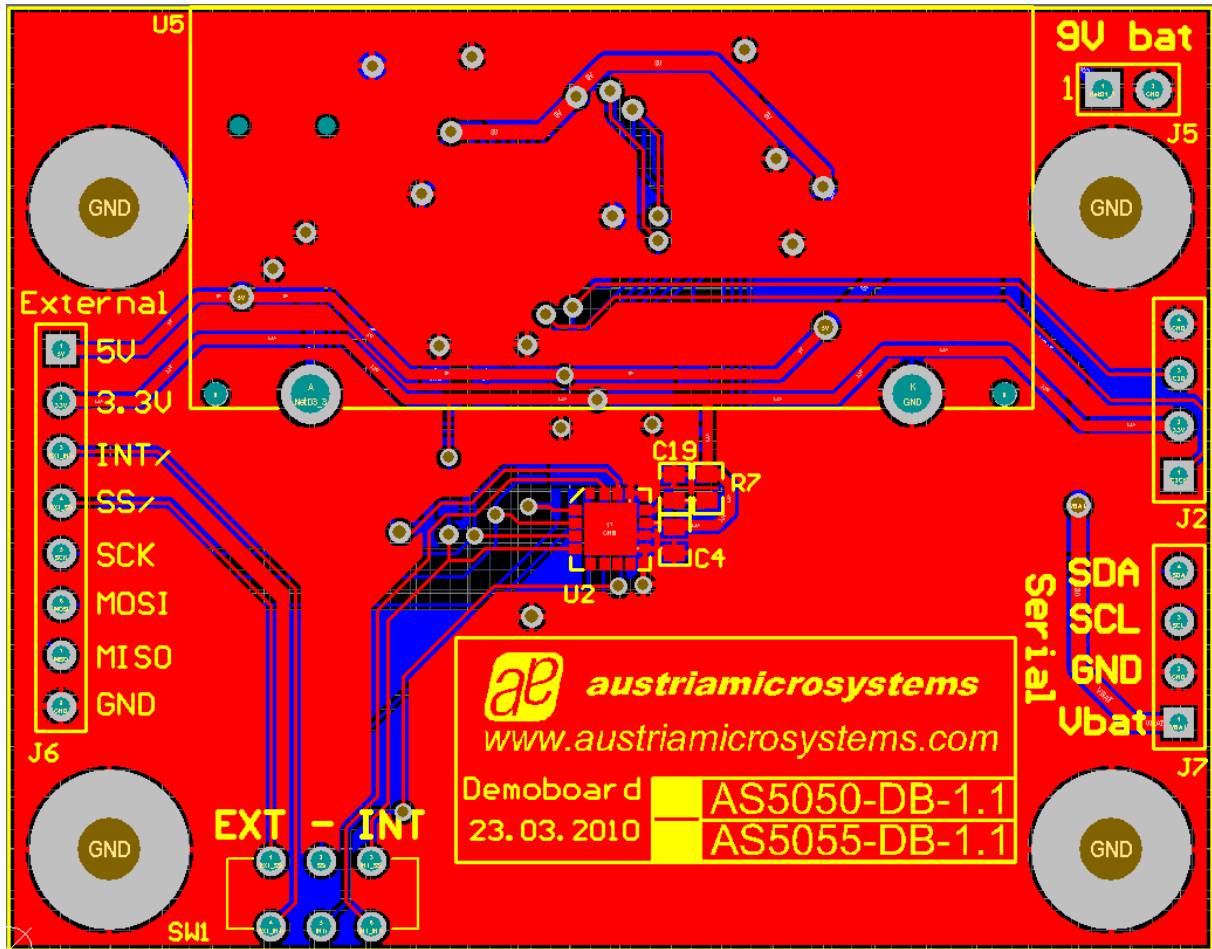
AS5050/AS5055 Demoboard PCB Layout
